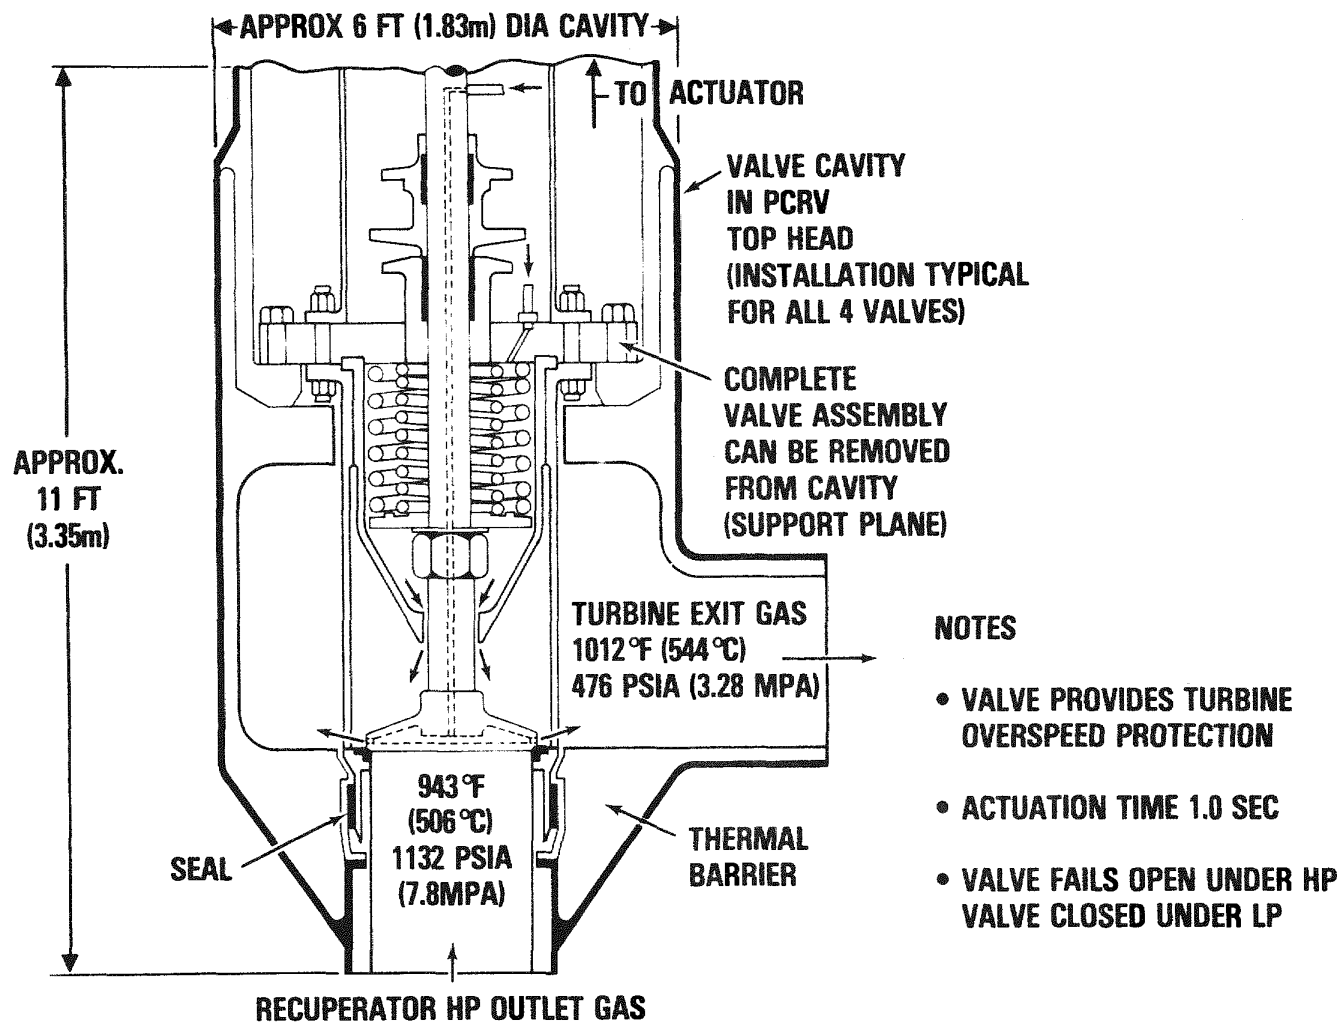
Safety valve for GT-HTGR plant; valve assembly is shown integrated in PCRV
